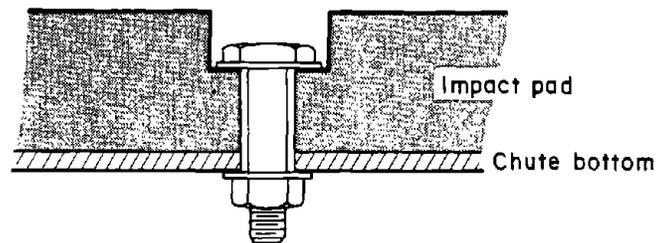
, - Impact pad fastened to the bottom of feed chute with countersunk holes for protection of boltheads.
